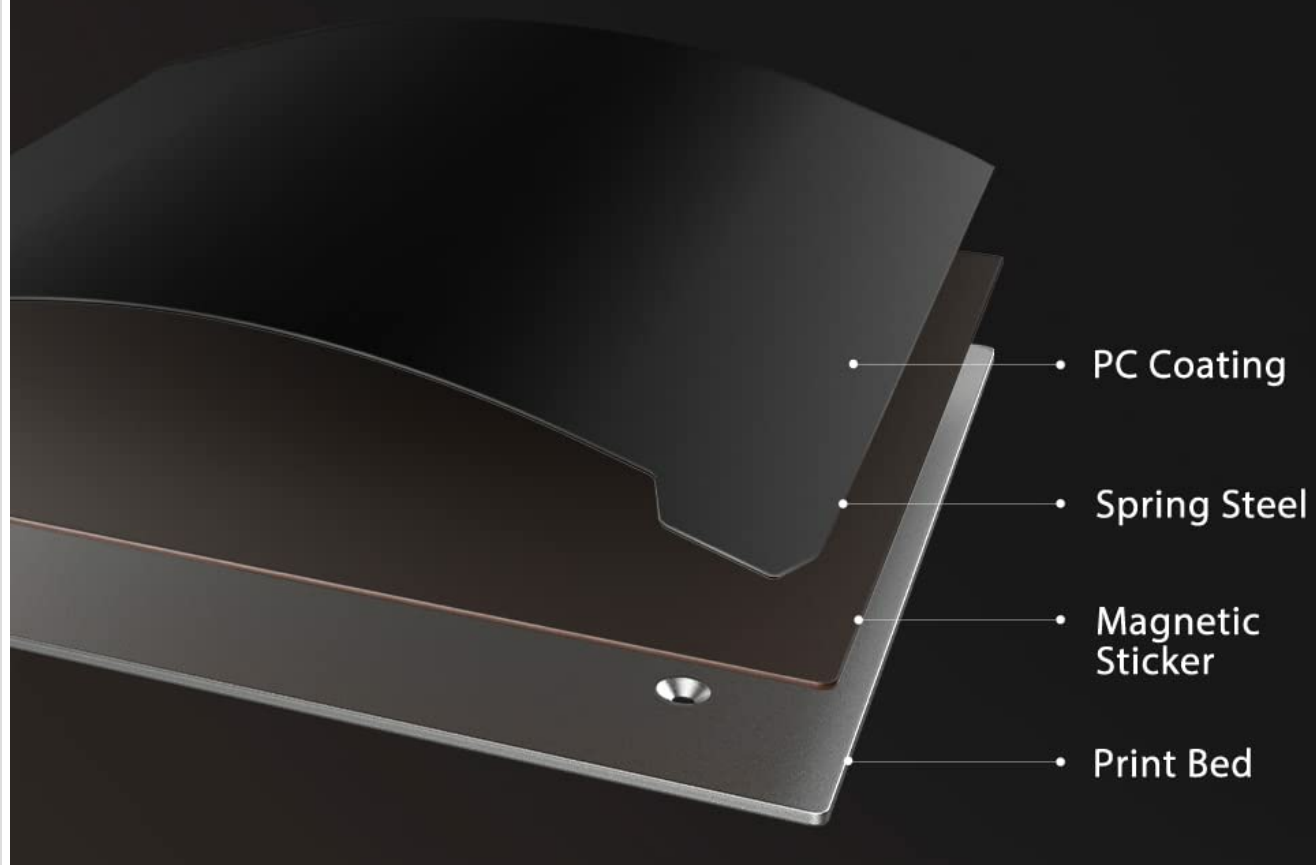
Exploded view illustrating the layers of the PC spring steel magnetic build plate: PC coating, spring steel, and magnetic sticker.
